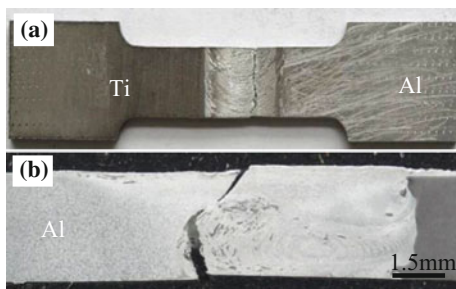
Specimen after the tensile test: a Top surface of tensile specimen; b optical image of a cross-section of joint
